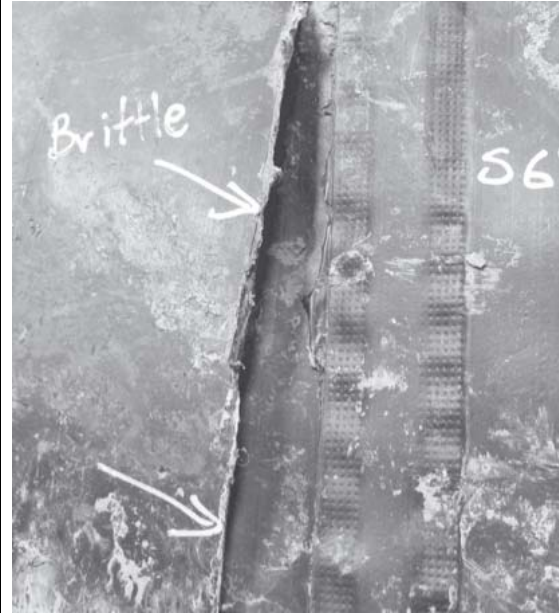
Example of stress cracking on edge of overheated weld [Scheirs]
